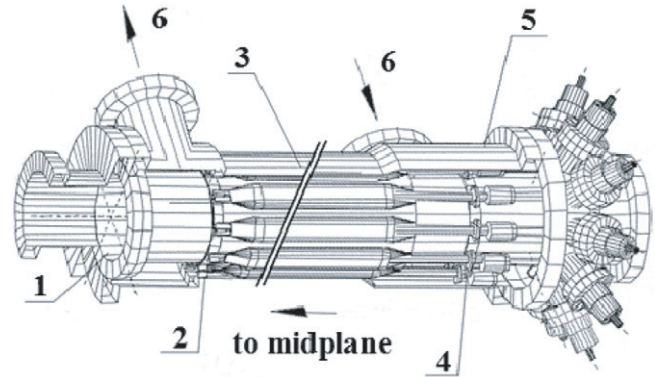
Elevation view of the TTA: 1—vacuum chamber, 2—sliding support, 3—rig, 4—rig attachment, 5—cover tube, 6—He gas coolant.
